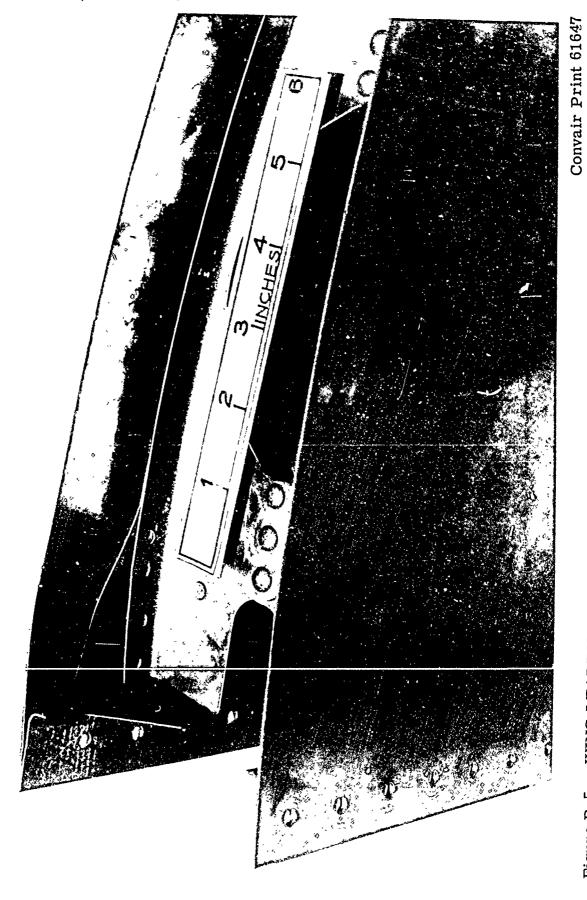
WING LEADING-EDGE ASSEM; End View of Specimen Showing Spotweld Failures.
